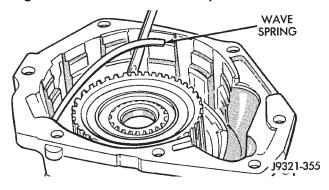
Overdrive Clutch Wave Spring Removal/ Installation
